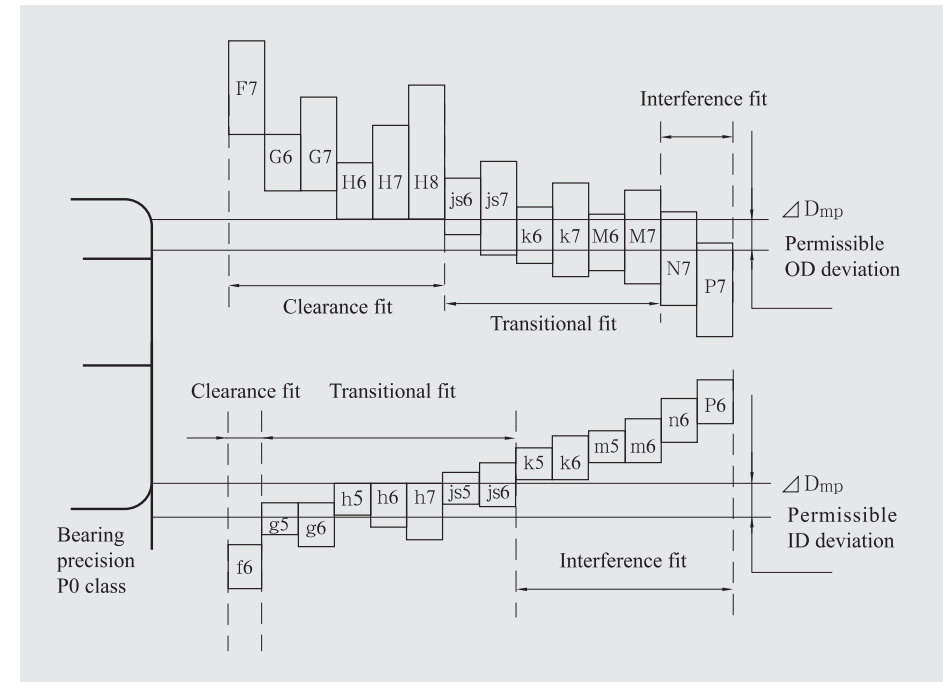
Relations between dimension tolerances of shaft and housing bore and fit (bearings of PO class precision).
